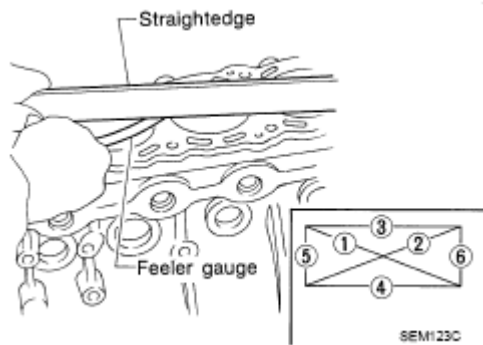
Checking Distortion Of Cylinder Block Upper Face
